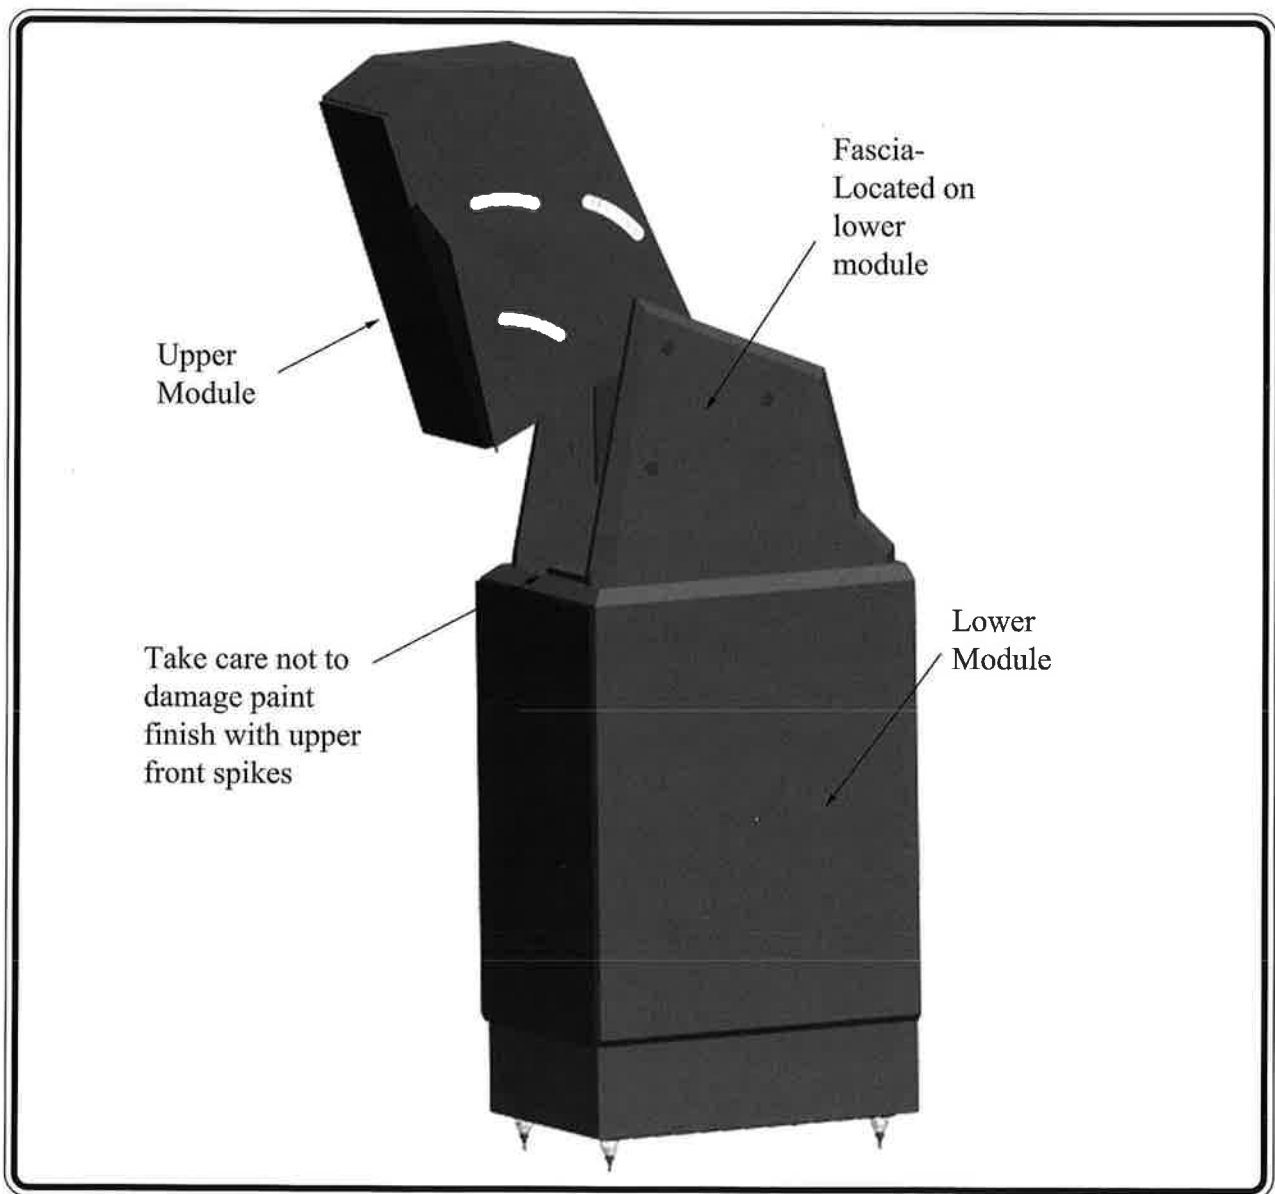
PLACEMENT OF MAXX UPPER ONTO LOWER MODULE
